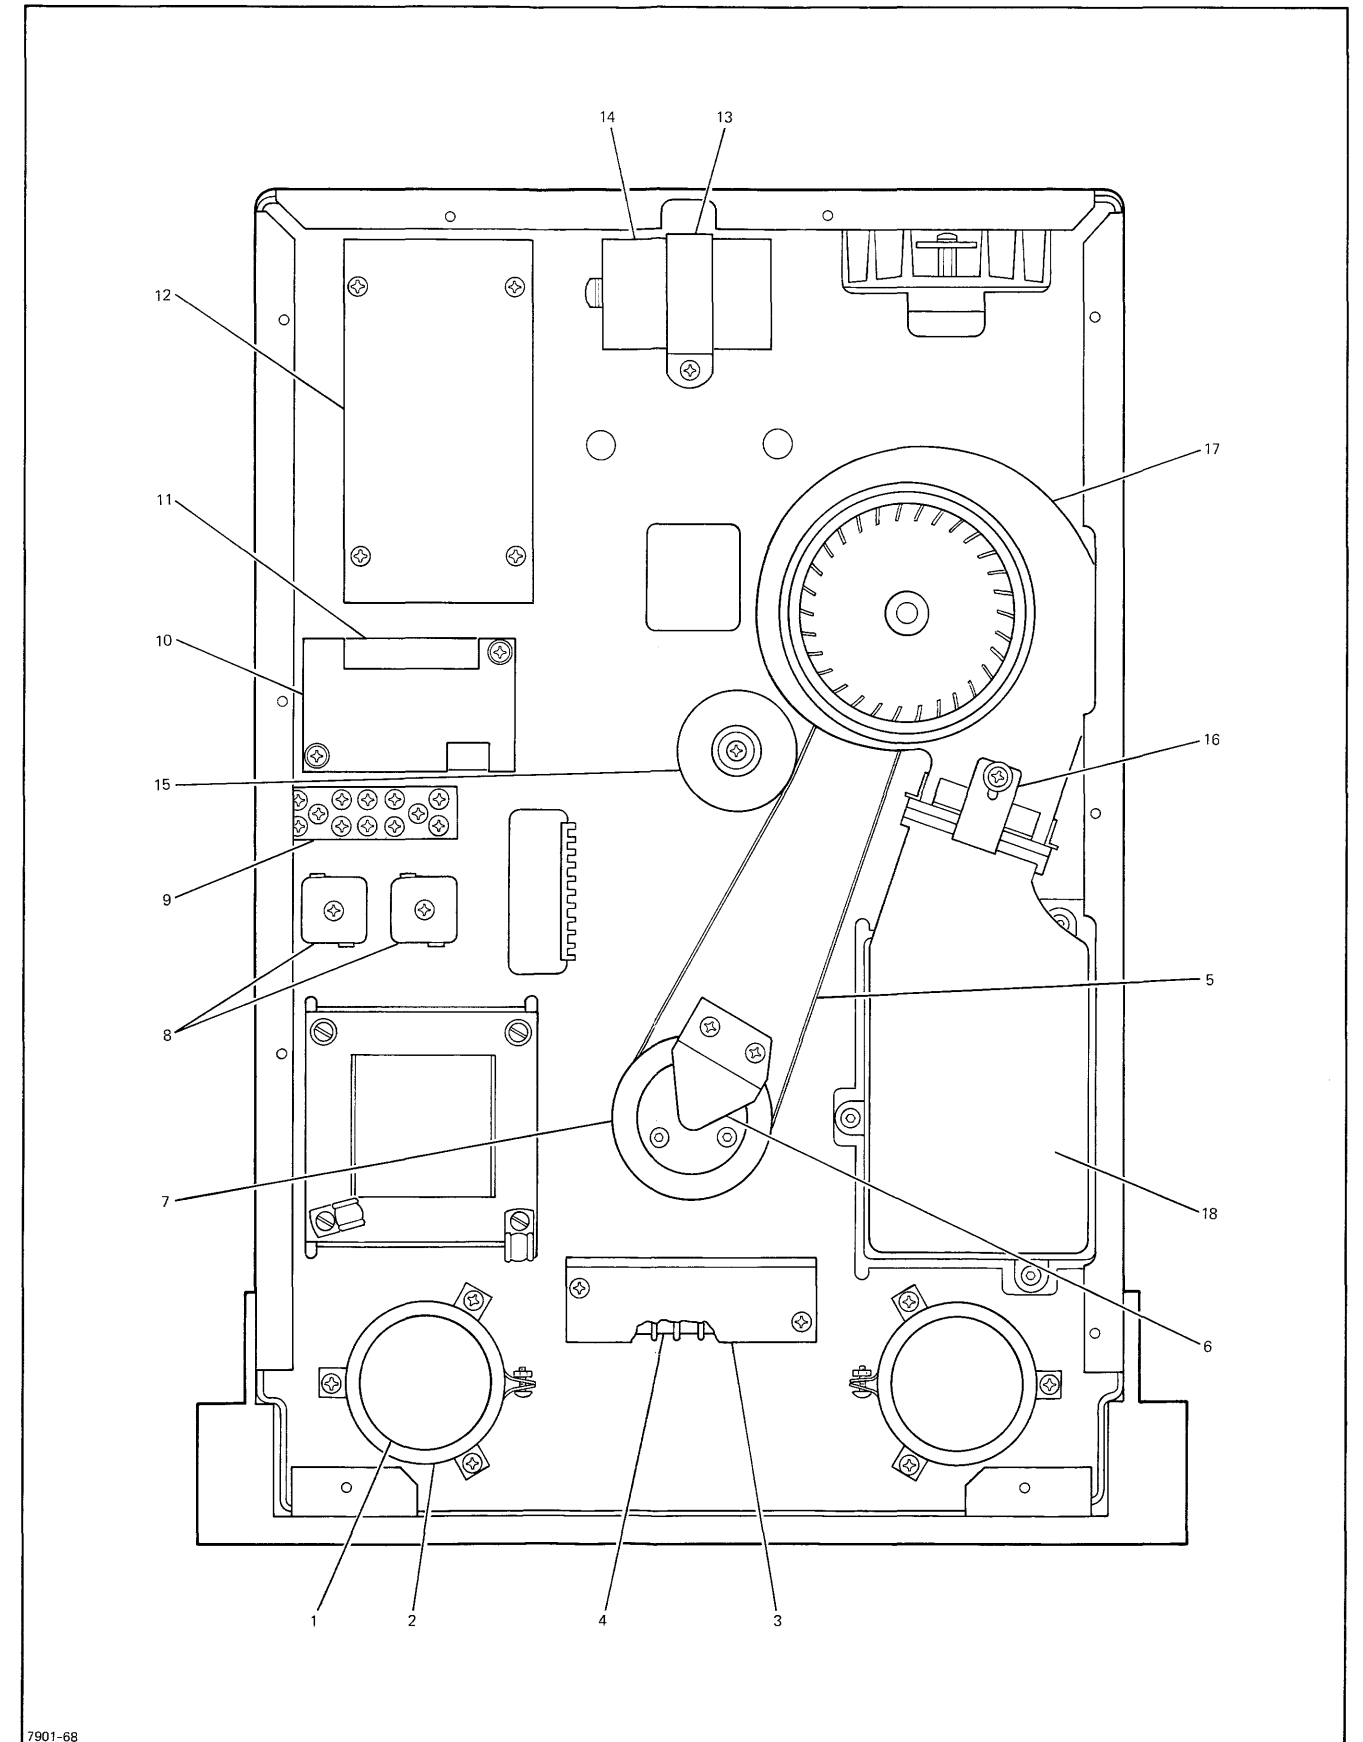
Lower Deck Assembly, Parts Location Diagram
